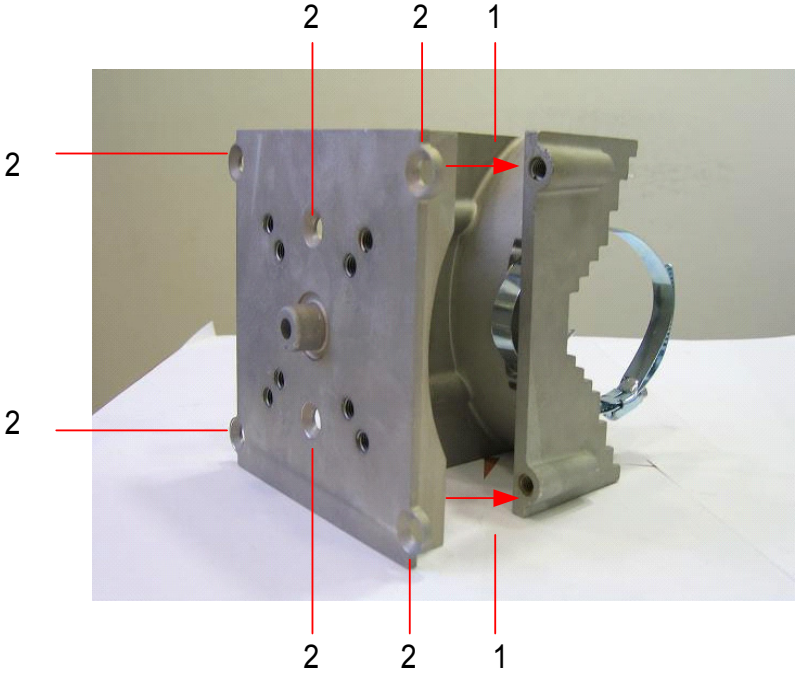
Attaching the Back Plate to the Pole Bracket
